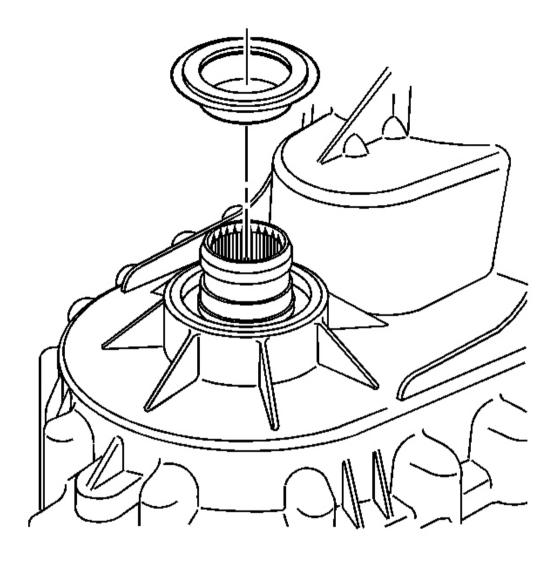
Inner Seal Race Courtesy of GENERAL MOTORS CORP.
